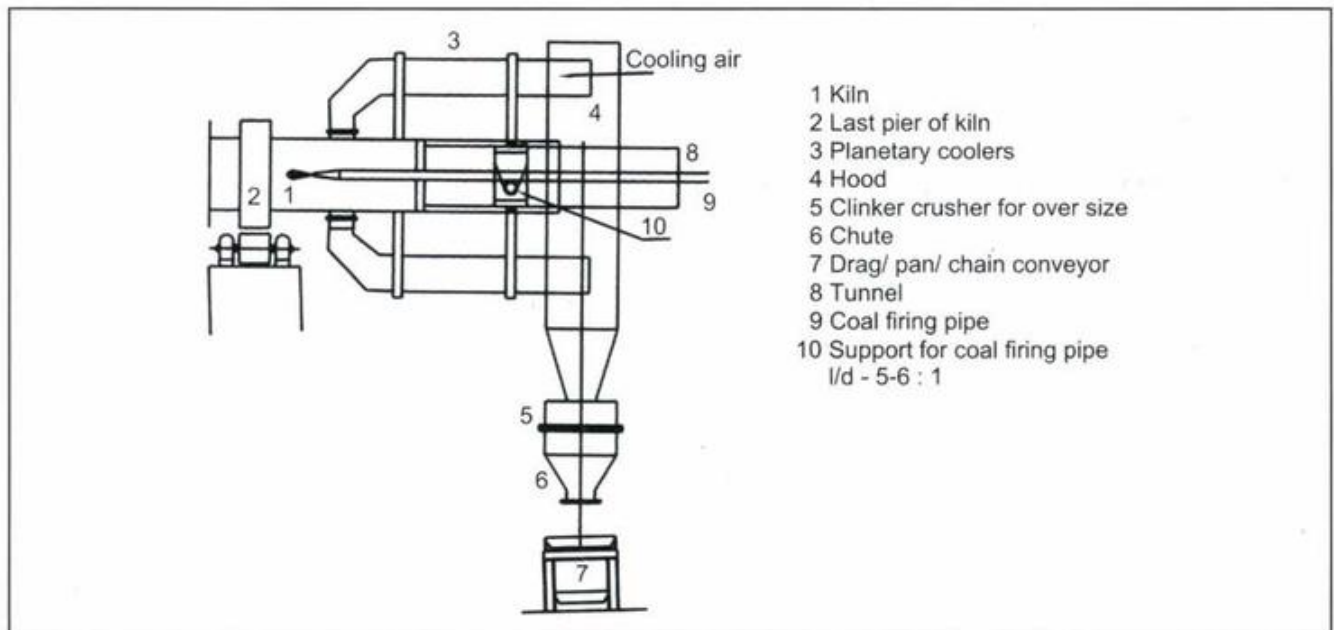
Kiln with planetary coolers – cooler tubes 10 to 12 nos.  $l/d = 5-6 : 1$ .
